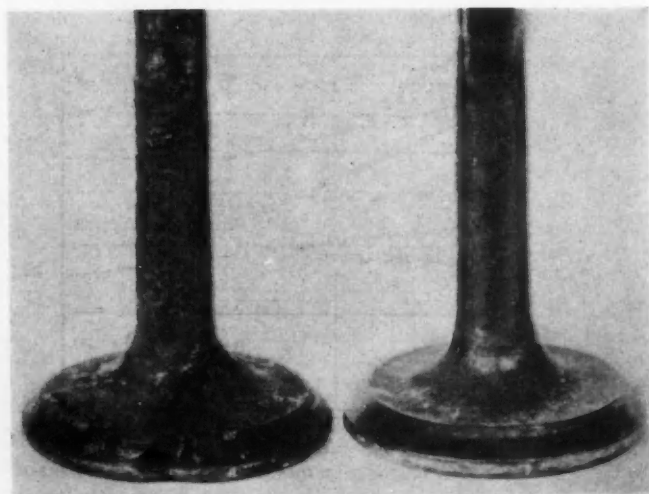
Valve rotation contributes much toward alleviating valve sticking, burning, and deposit formation, as these valves show. The one at left is a standard valve that operated for 40 hr; the one at right is a rotating type that operated for 100 hr
